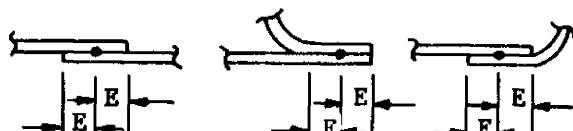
Edge Distances for Spot-Welded Joints.
